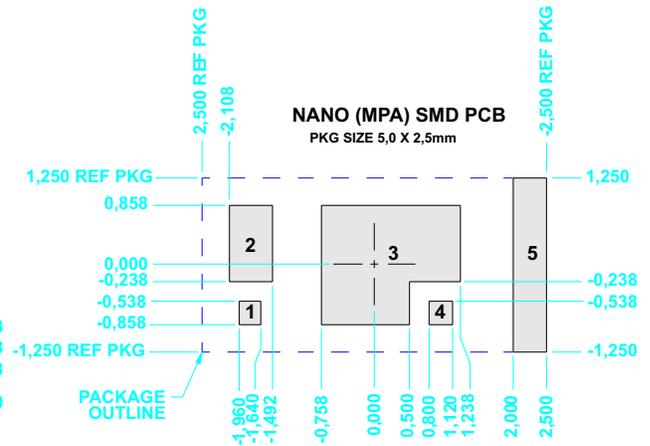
Nano (MPA) - Solder Mask Defined PCB Recommended Layout
